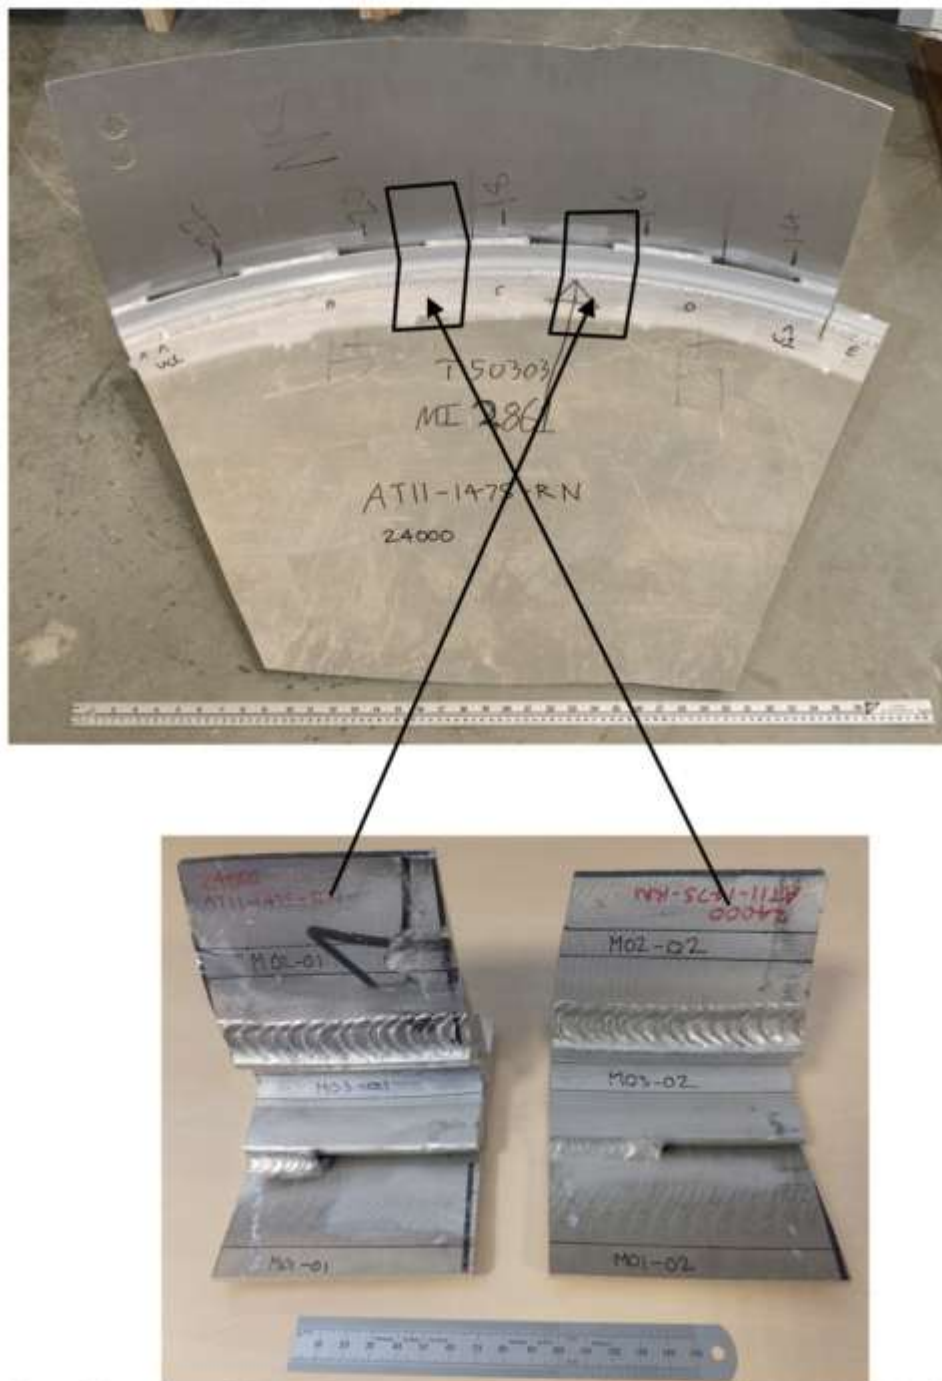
Locations of the tensile specimens. The weld metal was taken from position E (top) as shown in Figure 1.
